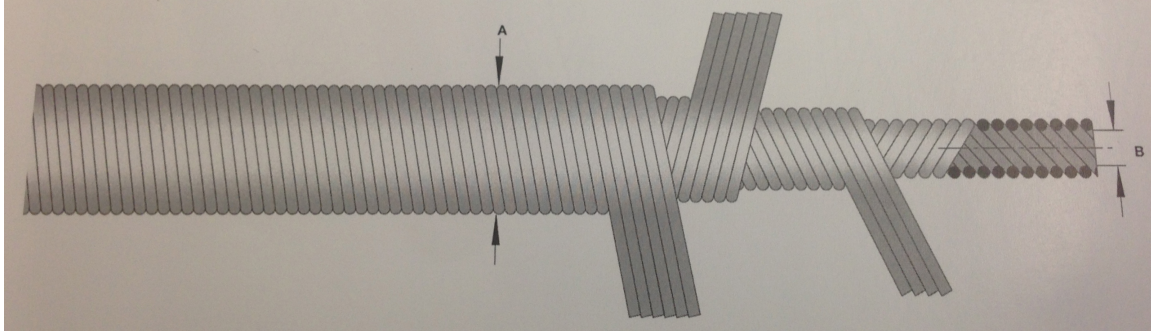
Structure of flexible hollow drive shaft used to transmit torque to threaded nut from outside the canal. Measurement A shows the outer diameter, while measurement B shows the inner diameter of the shaft. (Image provided by Suhner Transmission Expert)
